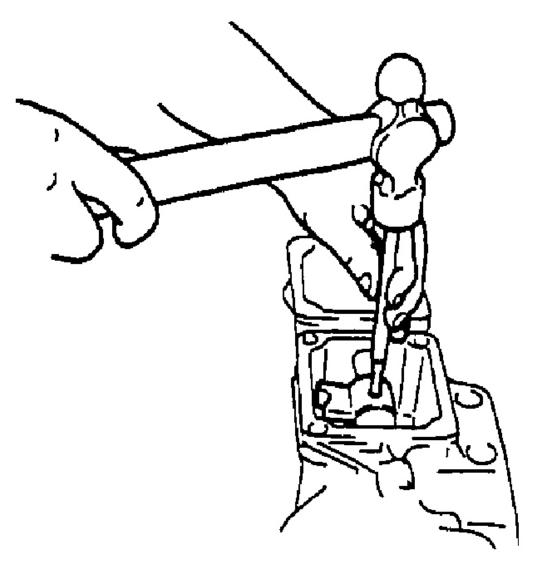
Removing Control Rod End Roll Pin Courtesy of MAZDA MOTORS CORP.
